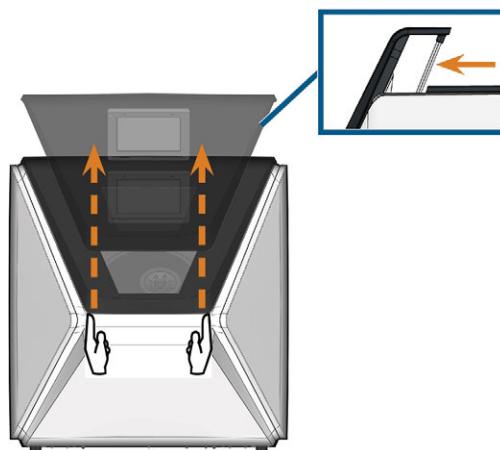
EMERGENCY OPENING OF THE WORKING CHAMBER DOOR AND CHECKING THE GUIDE RAILS
